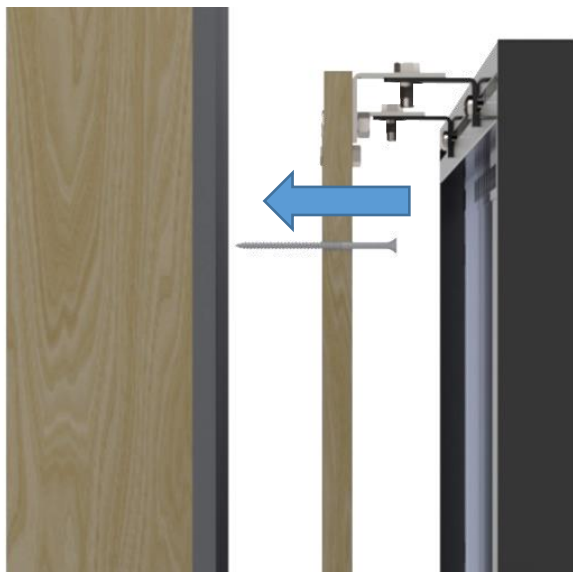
Side view render of WSDQ showing action needed to mount frame to wall with wallboard and screw.
